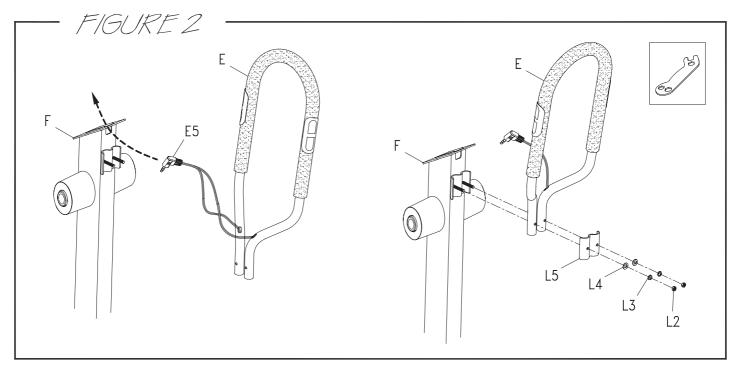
ASSEMBLY FOR SMALL HANDLE BAR
